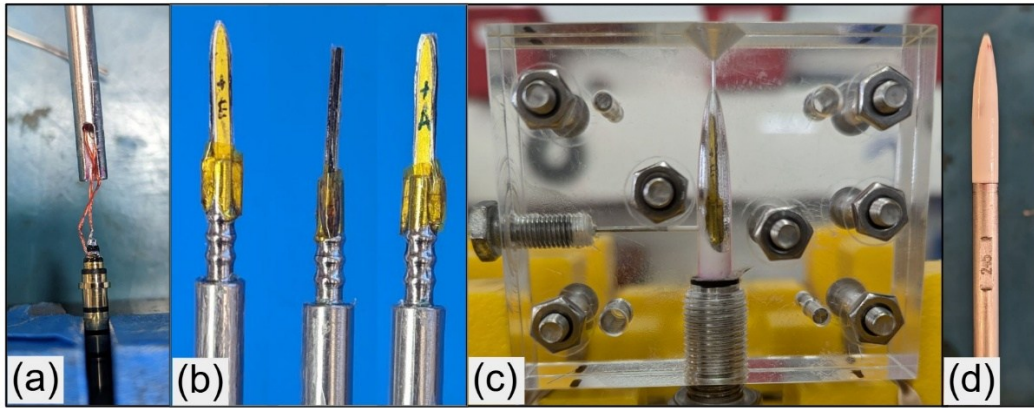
[a] Two pairs of 36 Ga magnet wires soldered to the TRRS jack before insertion into the sting [b] Three views of the sensing element in the sting just before injecting epoxy [c] Silicone being injected in the mold during the final step of manufacturing [d] A finished PVDF shear probe.
